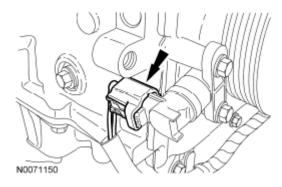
Locating Crankshaft Position Sensor Wire Harness Retainers Courtesy of FORD MOTOR CO.
